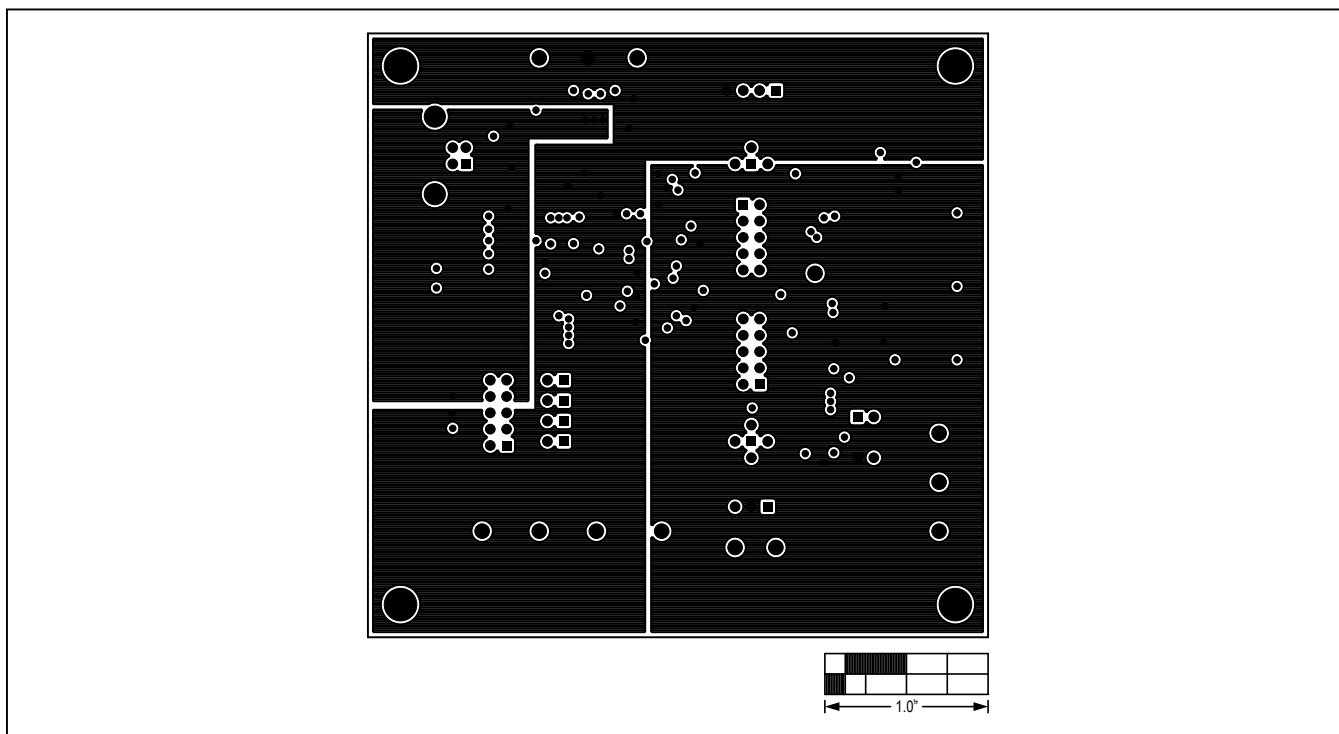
MAX5395L EV Kit PCB Layout—Inner Layer 3
